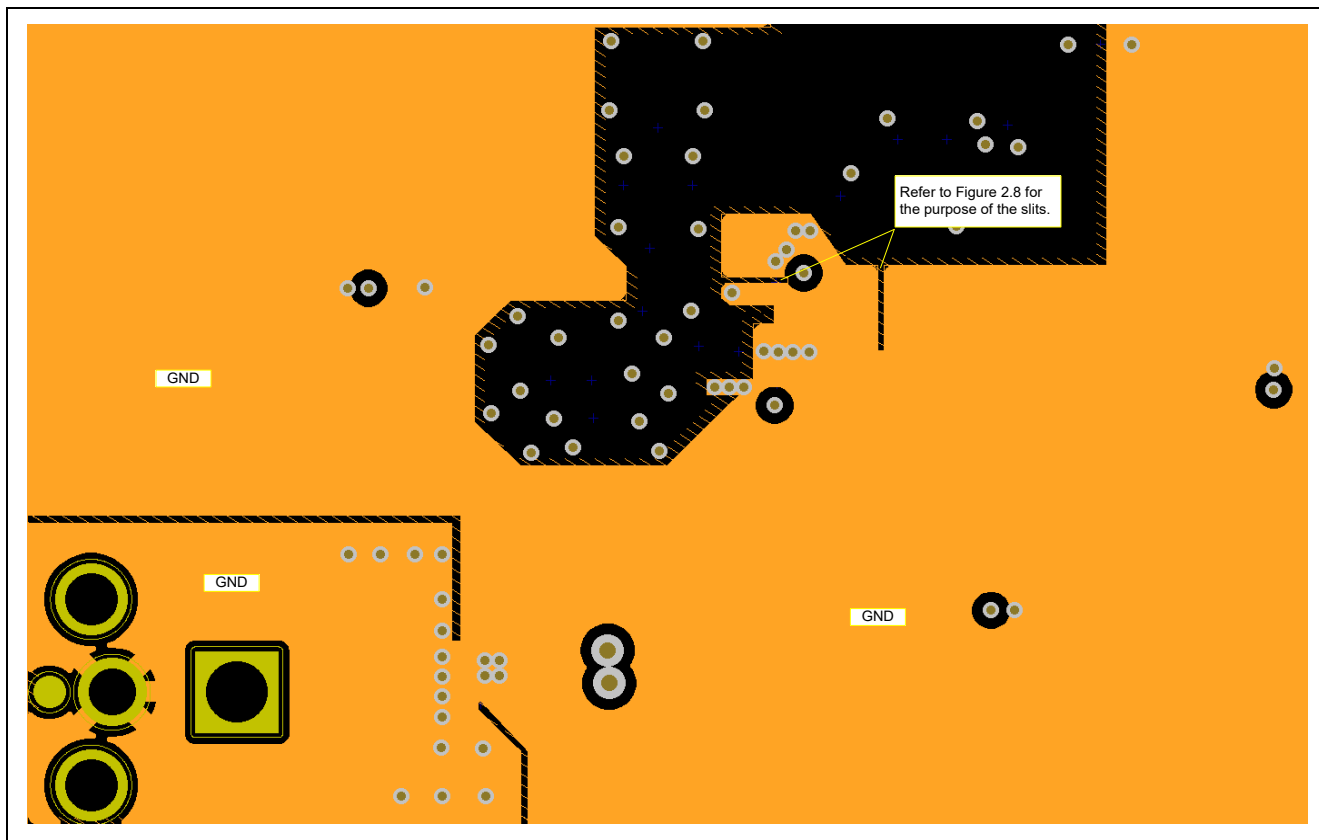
Example Board Wiring Pattern (Second Layer Wiring Pattern)
